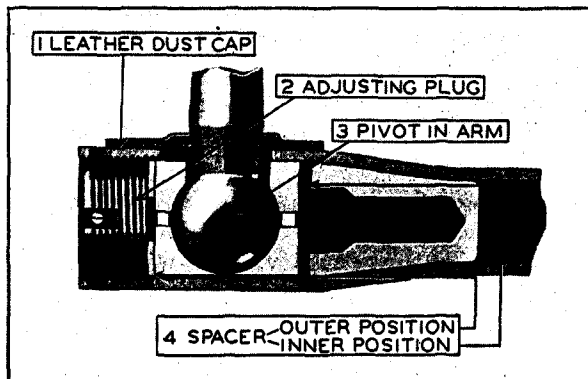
Sectional View of Ball and Socket Joints at Ends of Parallel Rod
